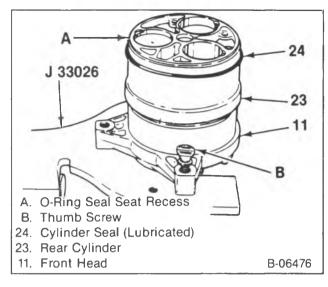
Installing the O-Ring Seals on the Cylinder Seal Races
